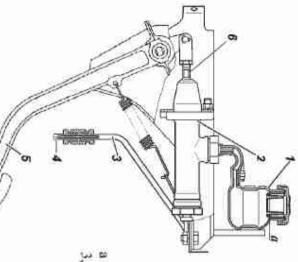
Drive Of Clutch Master Cylinder: a — fluid level; 1 — tank; 2 — master cylinder; 3, 4 — pipes; 5 — pedal; 6 — tappet
